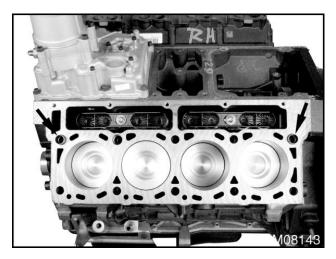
Cylinder head spring dowel pins in crankcase (typical)
